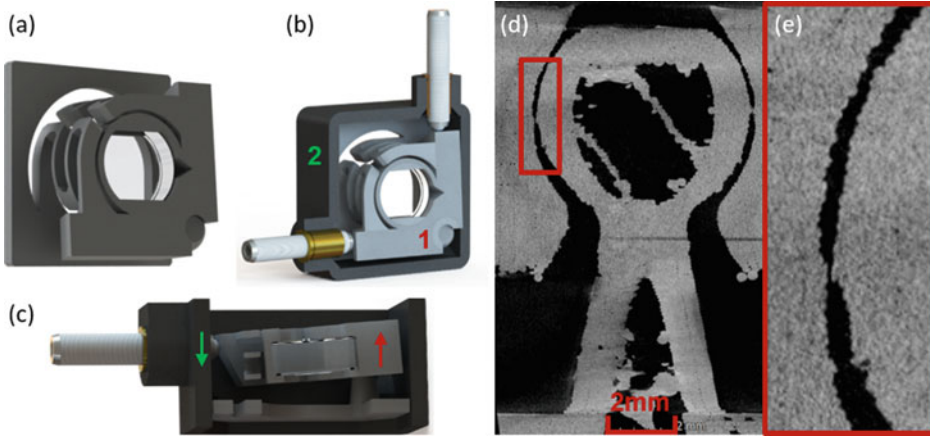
a CAD model of mirror mount with imprinted mirror (part 1). b Mirror mount imprinted in frame (part 2) with fine adjuster screws and bushing. c Cross section of combined part with printing direction indicated. d Cross section through the printed ball joint. e Magnification by a factor of four of the area marked in red
